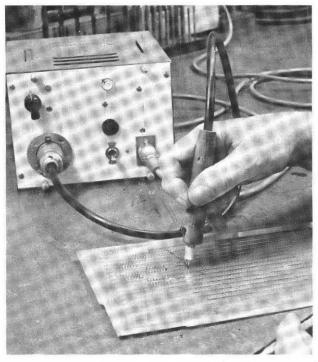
Making a heat-pulse soldered joint using the new control unit.
